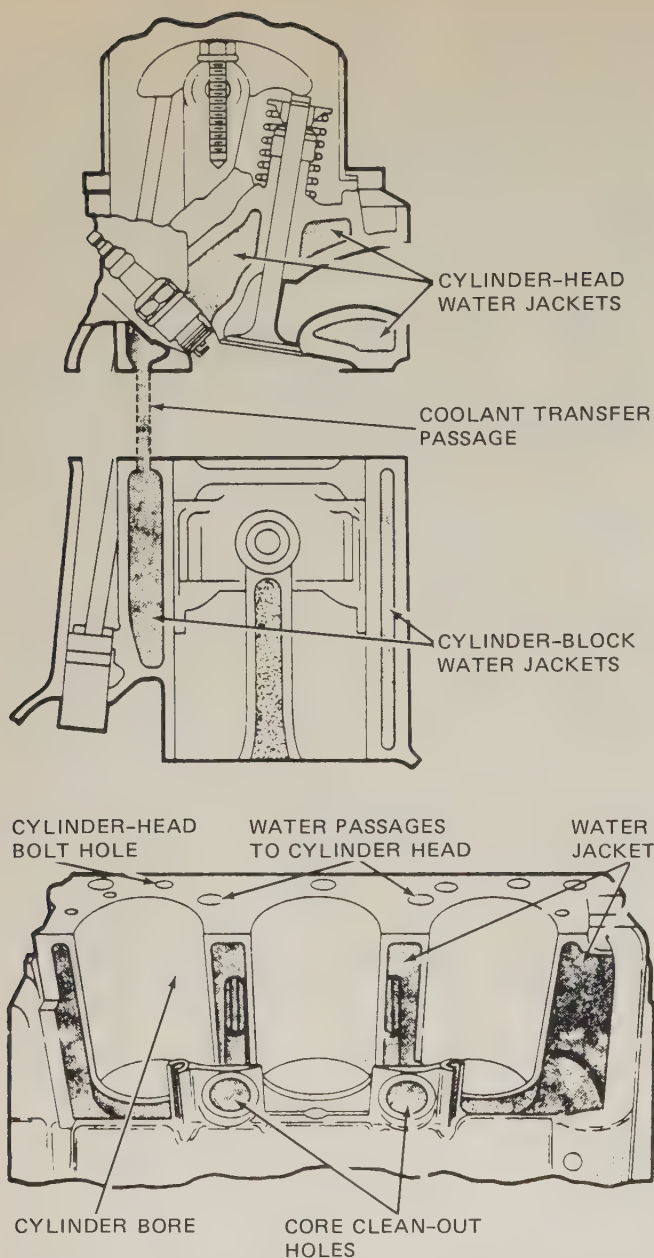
Water jackets, or coolant passages in a cylinder block and head.
